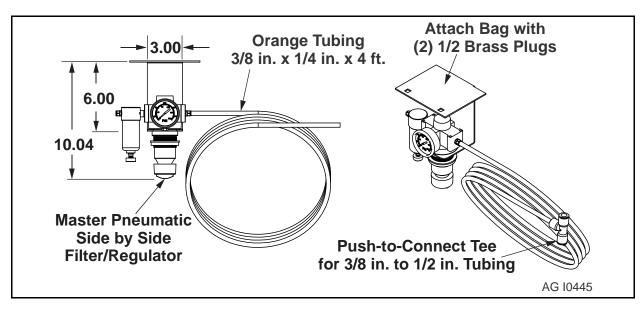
1 Air Control Assembly Kit (Filter/Regulator)
